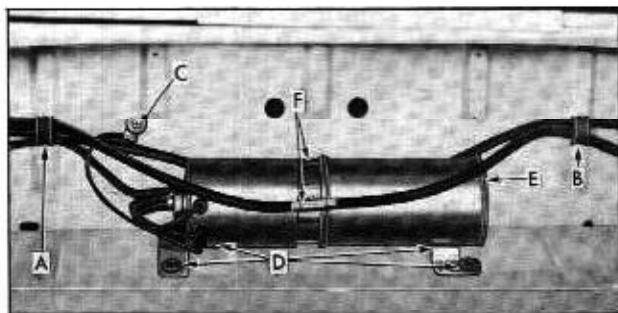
Hydro-Lectric Motor and Pump Assembly
